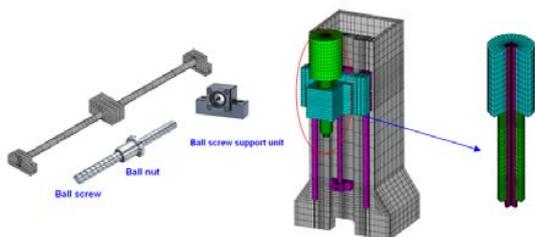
Finite element mode of the machine frame of milling machine integrated with the spindle-bearing model.
